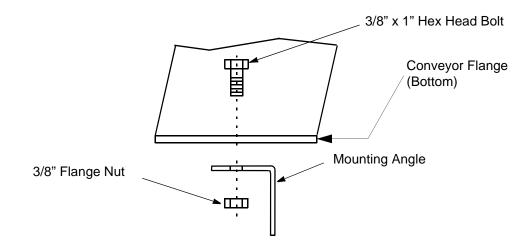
Mounting Angle Attached to Bottom Flanges
